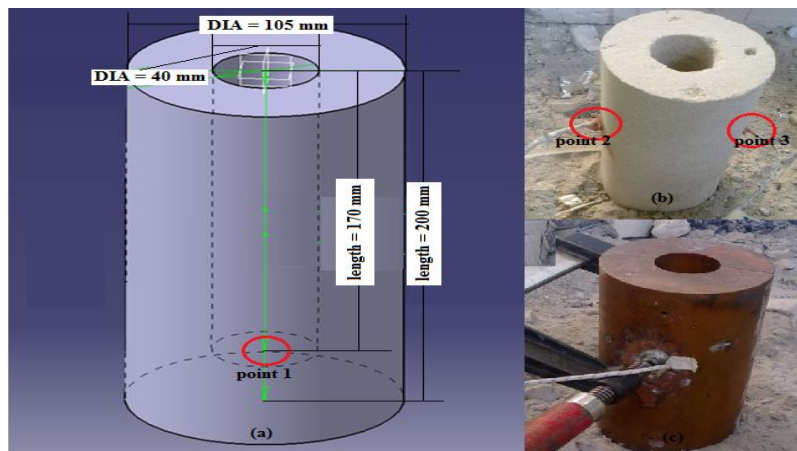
(a) shape and dimensions for mould (b) sand mould and (c) permanent mould.
